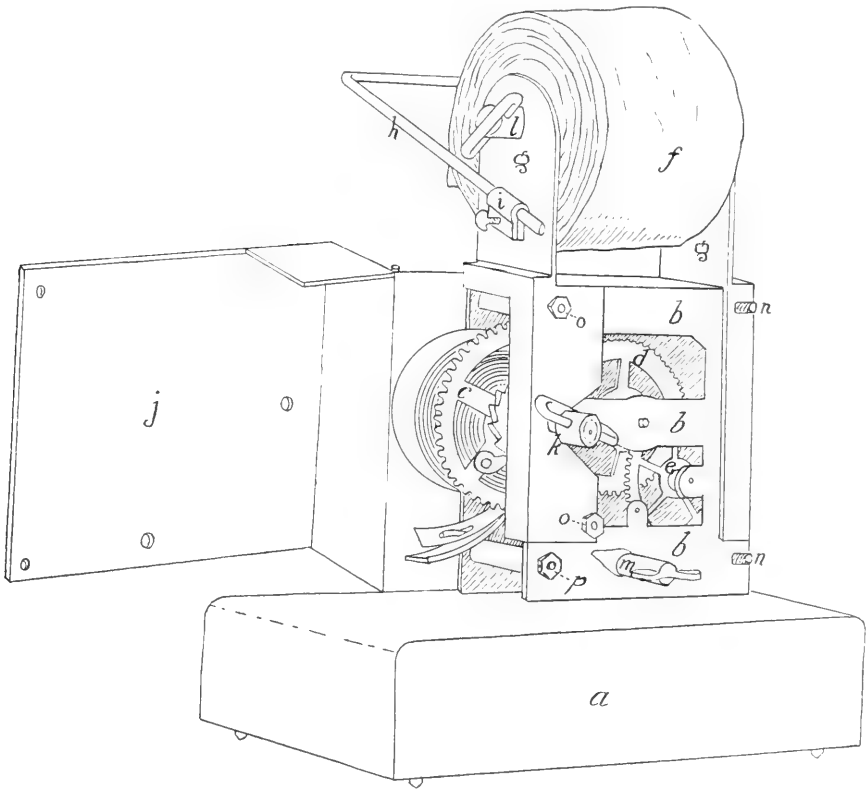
Showing the construction of the device. *a*, heavy metal base; *b*, frame; *c*, spring cogwheel; *d*, intermediate cogwheel; *e*, spool-cogwheel on which tape-tensor is wound; *f*, tape; *g*, tape standard; *h*, tape guide; *i*, tape guide clamp; *j*, movable part of case swinging open; *k*, spring key; *l*, tape key; *n*, fastening screws for movable part of case (*j*) and for frame (*b*) as well as for tape standard (*g*); *o*, fastening screws for frame (*b*) and tape standard (*g*); *p*, fastening screws for frame (*b*).
